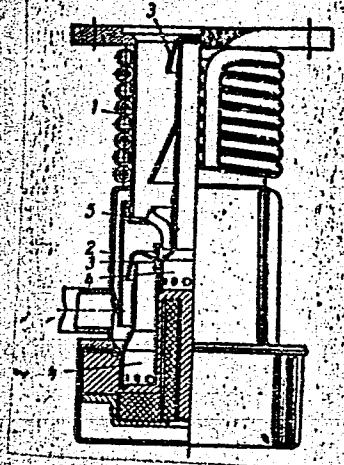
1--housing; 2--cooling jacket; 3--distributor nozzles; 4--condensers; 5--receiver
